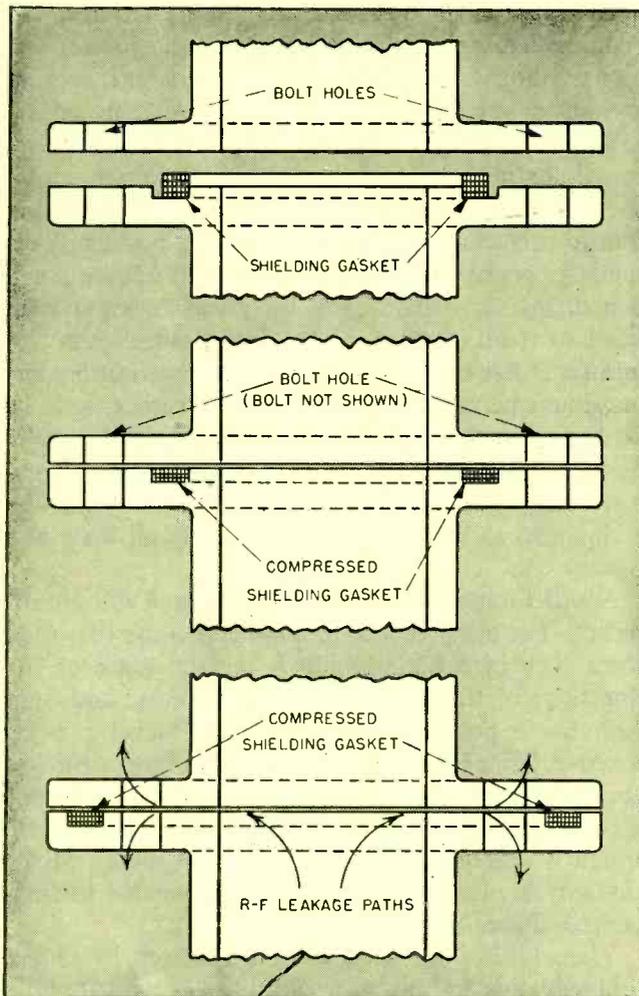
Sealing a flange joint against radiation. For best results metal gaskets should be located inboard of bolt holes
